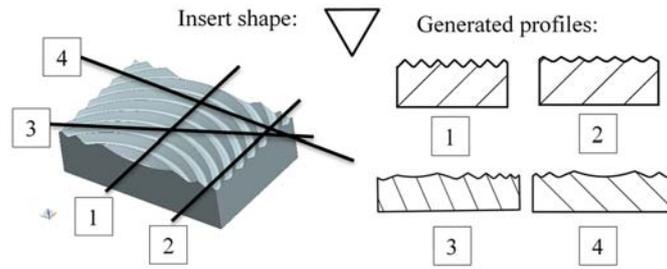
Tool imprints generated on surfaces machined by face milling cutter
